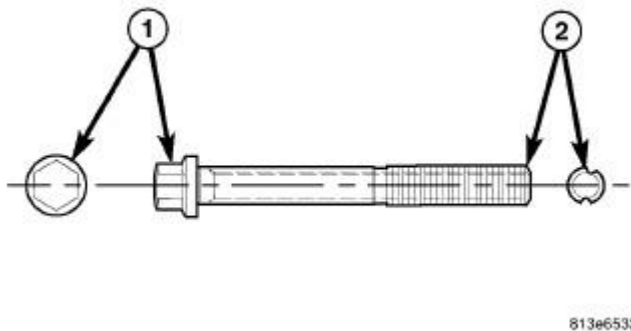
WHEEL ALIGNMENT ADJUSTMENT BOLT
